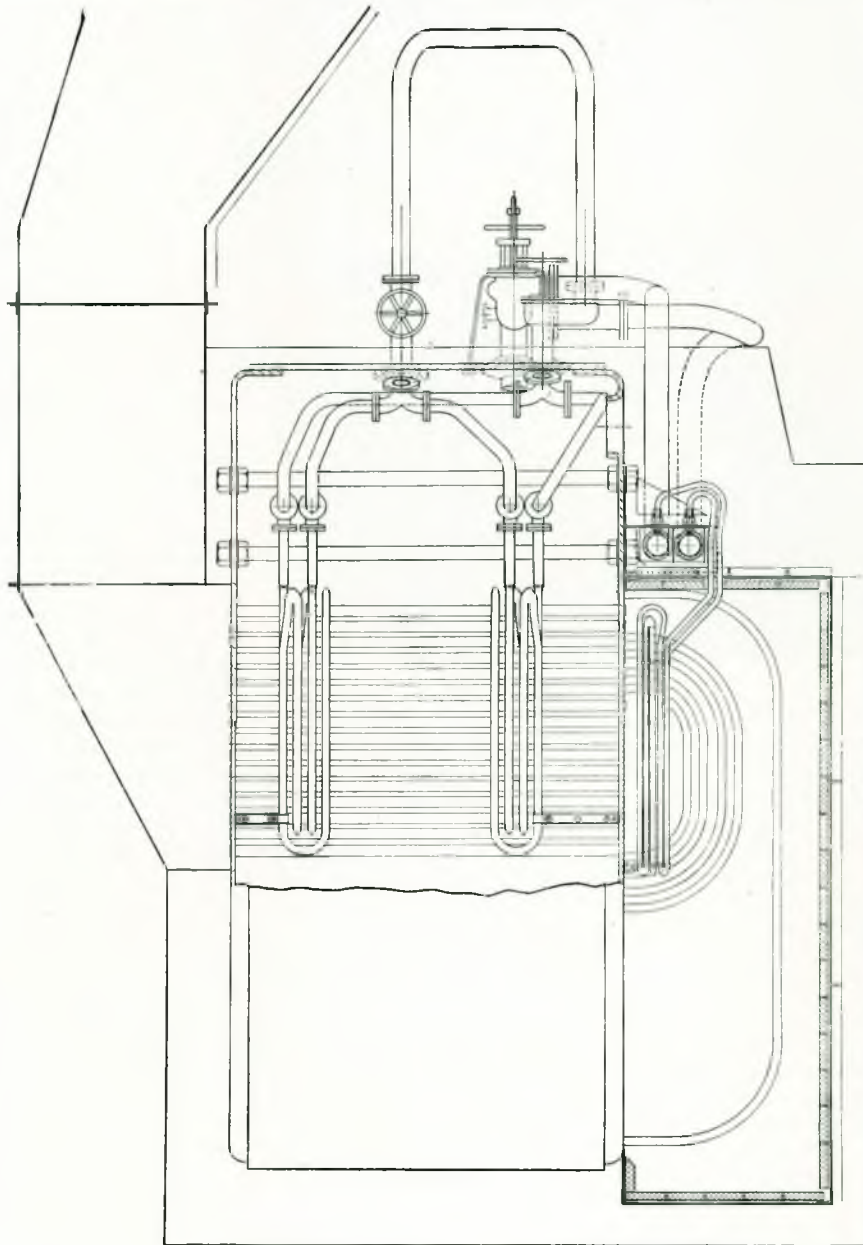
Howden-Johnson boiler, showing superheater and desuperheater.
